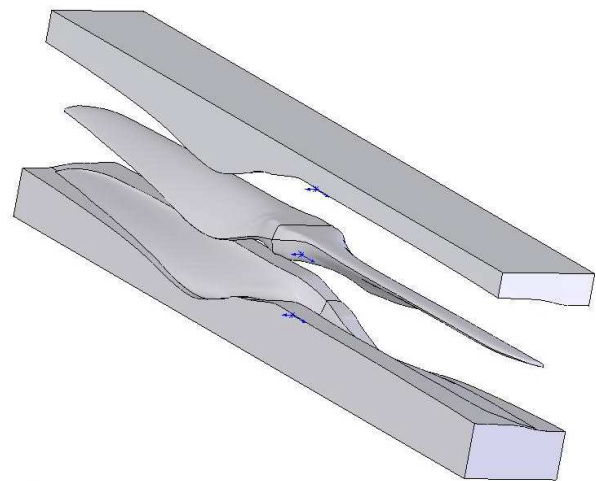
Solid bodies of: propeller, the core and the cavity of mould
